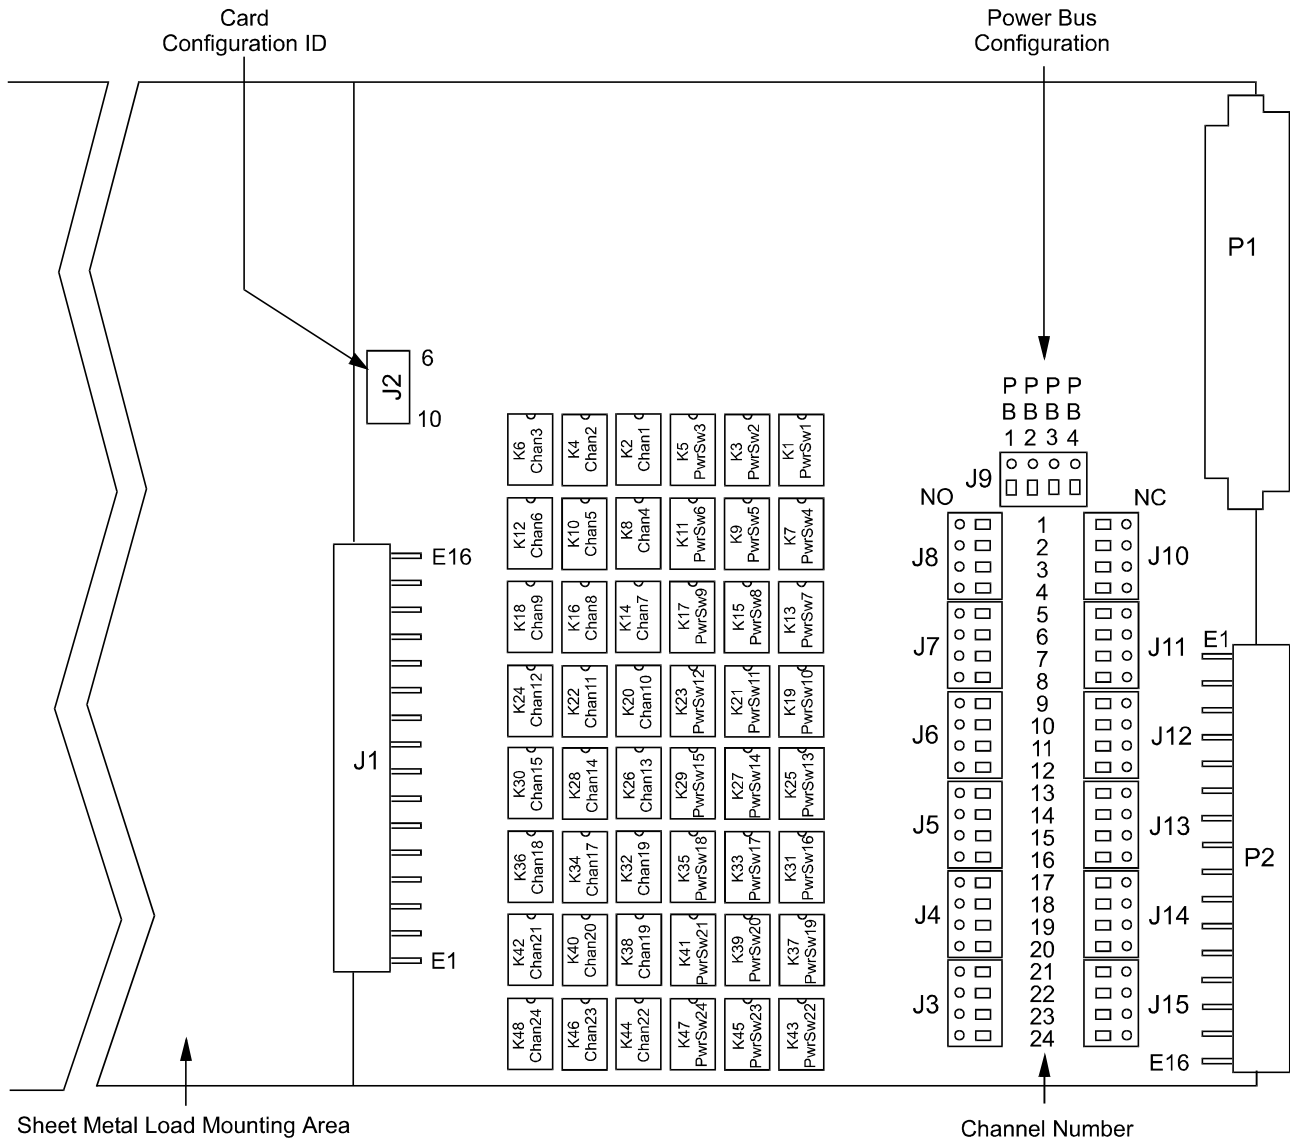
HP E6177A 24-Channel Load Card Jumpers
